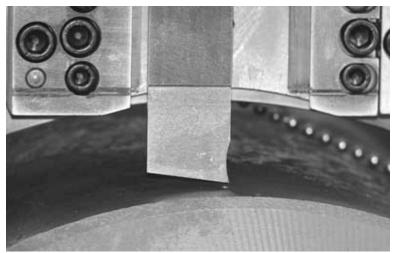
The tip of the parting tool should be about 1/8" (3 mm) from the pipe surface.
